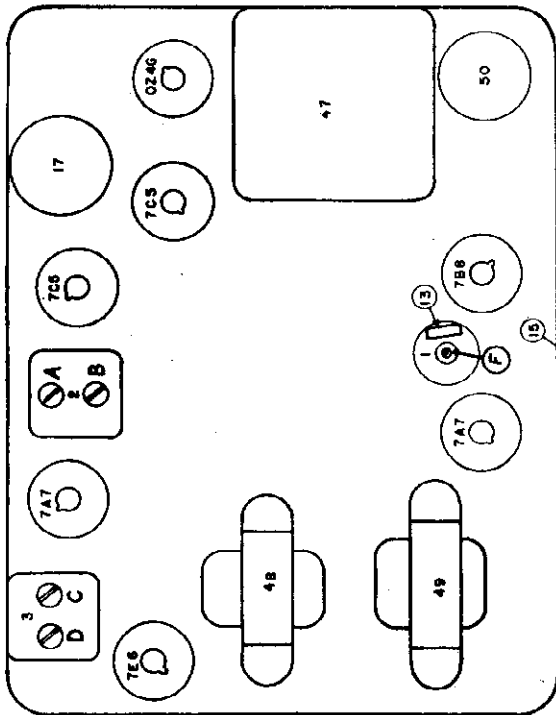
Parts Layout-Top View-Cadillac 1940 Rear Compartment Radio
